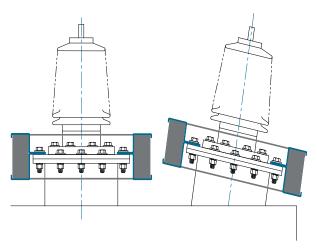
Custom bracket installation mounted to and partially below the turret flange
